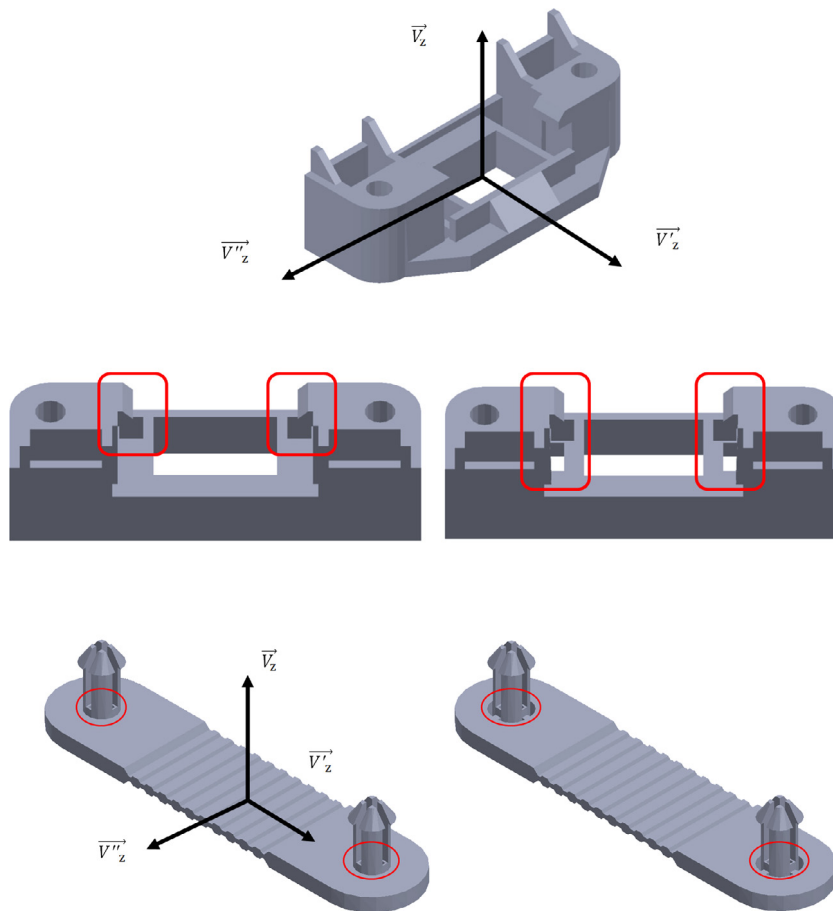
Cases F and G. Parts with non-demoldable regions, geometrically modified to improve their demoldability.
